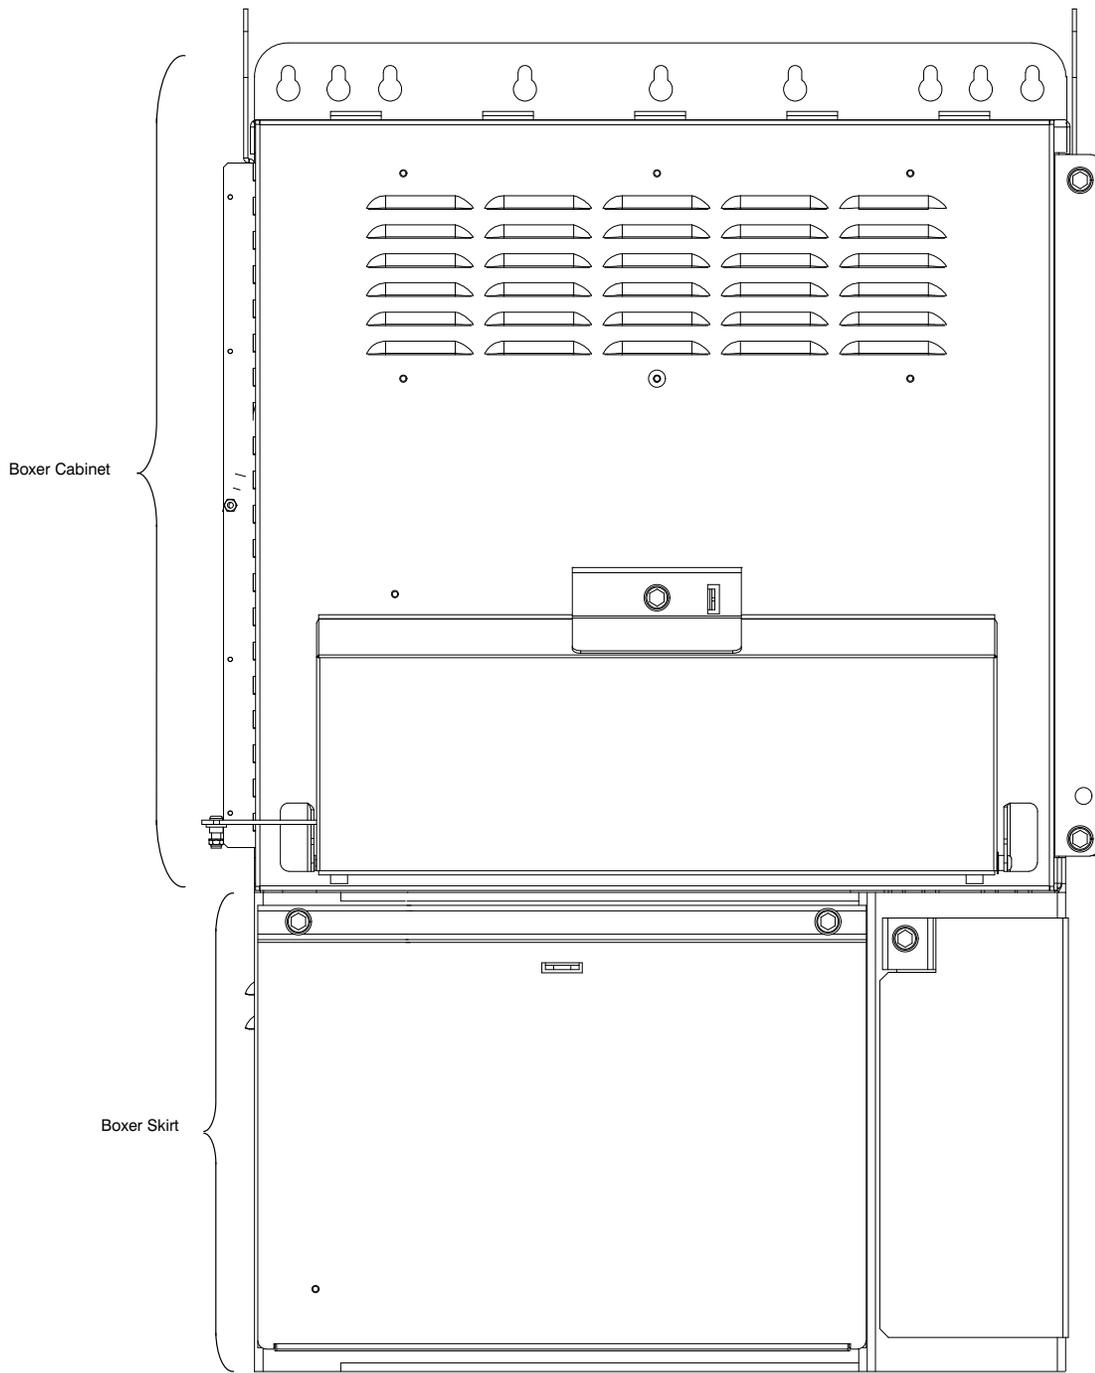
Front View of Combined Boxer Cabinet and Skirt (Secured Together)
